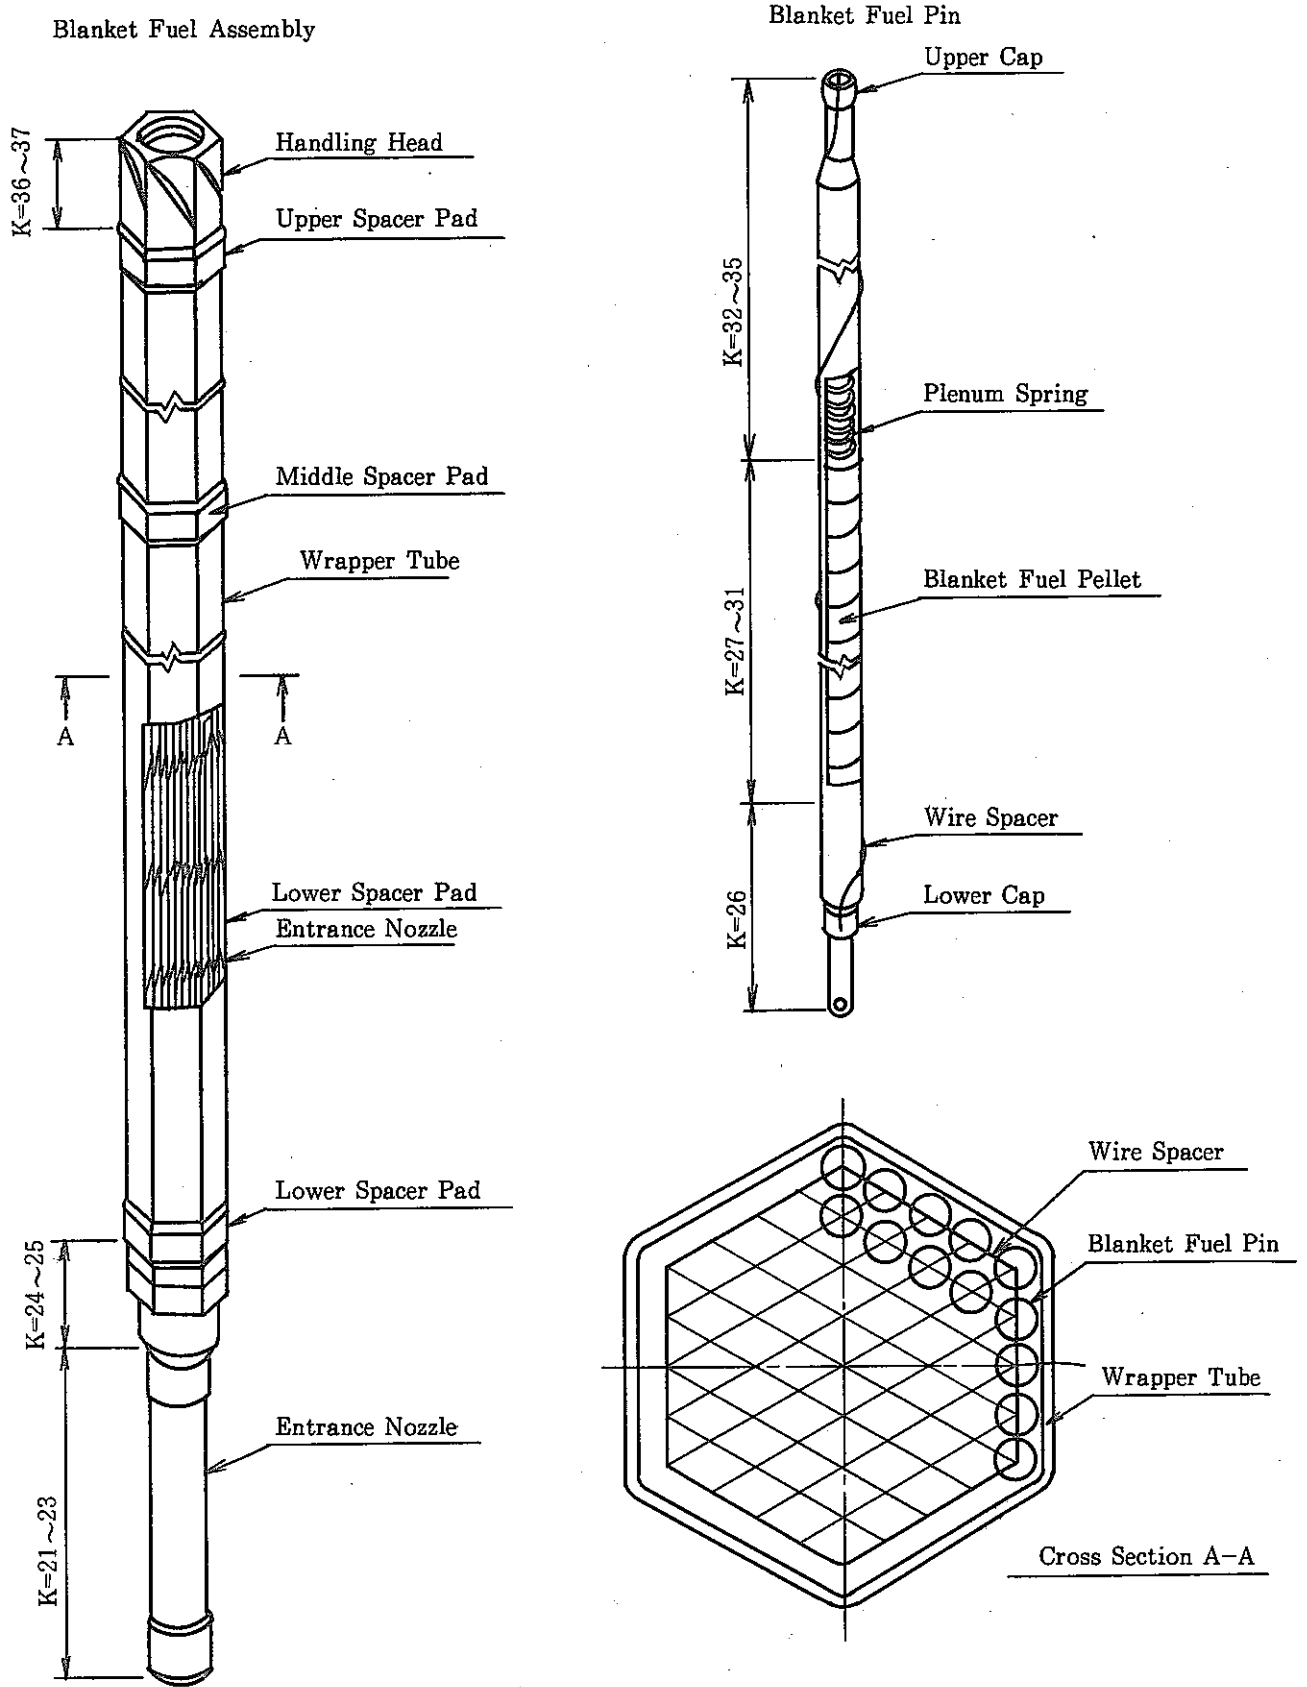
Geometry of the Blanket Fuel Assembly
